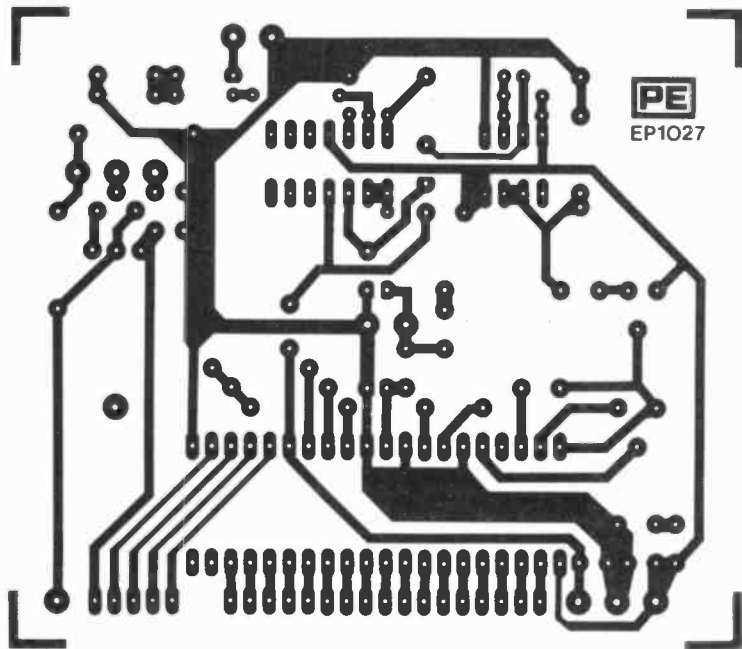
Printed circuit board layout (actual size) of the Tacho's main processing board
